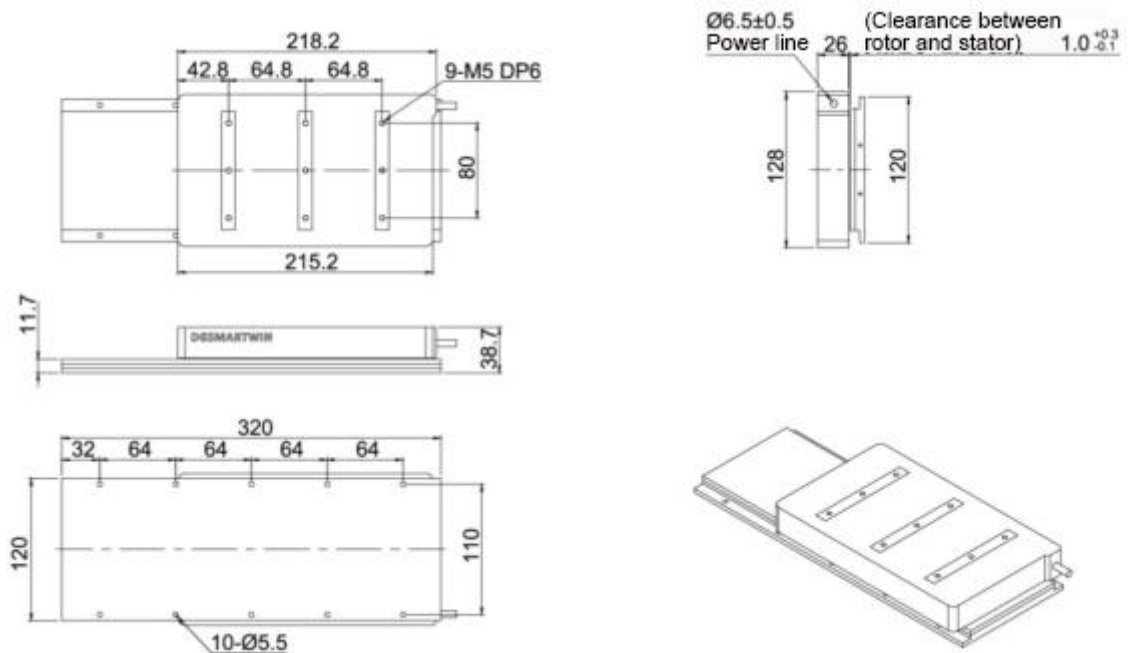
Dimensional drawing of WZCR-AZ120C3-□ motor
